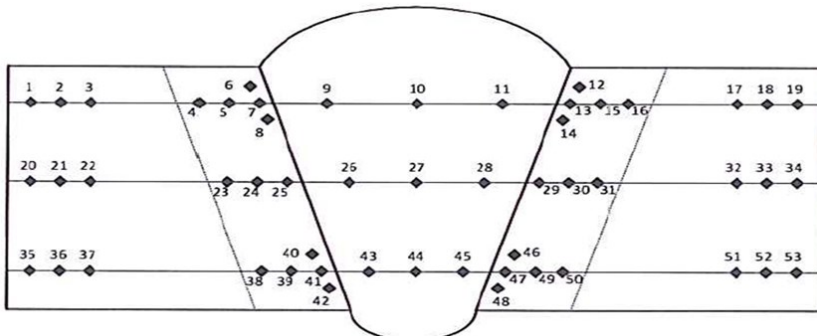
Hardness survey locations of G130 test plate welded with 740H filler.
